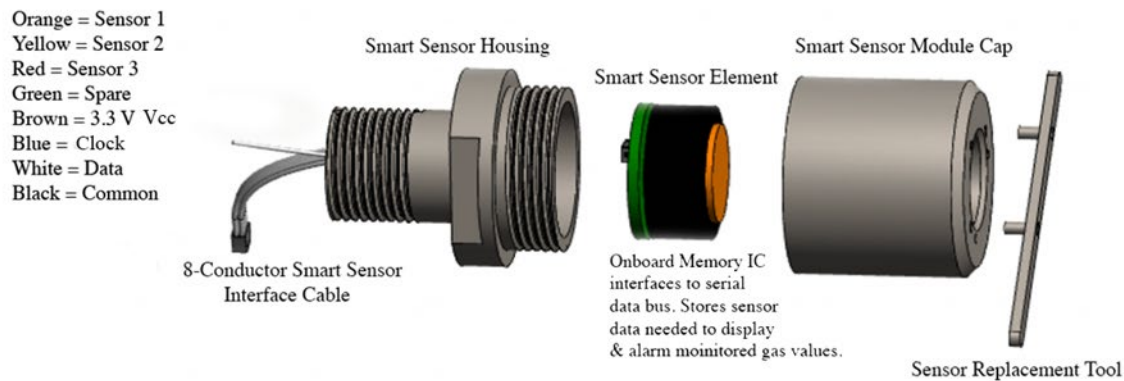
Smart Sensor Module (80-8000-00A0-10)
